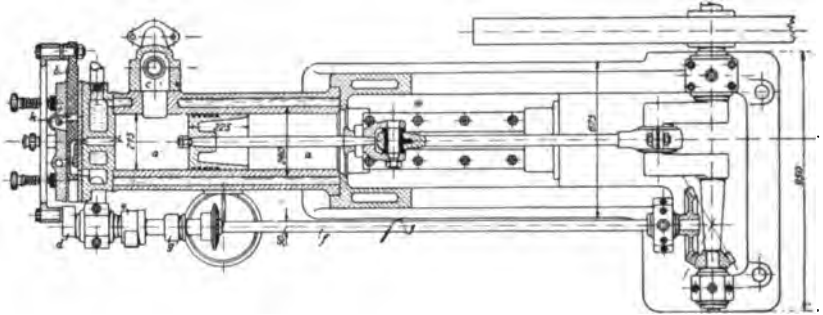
Horizontal Section Otto Engine of 1884.
